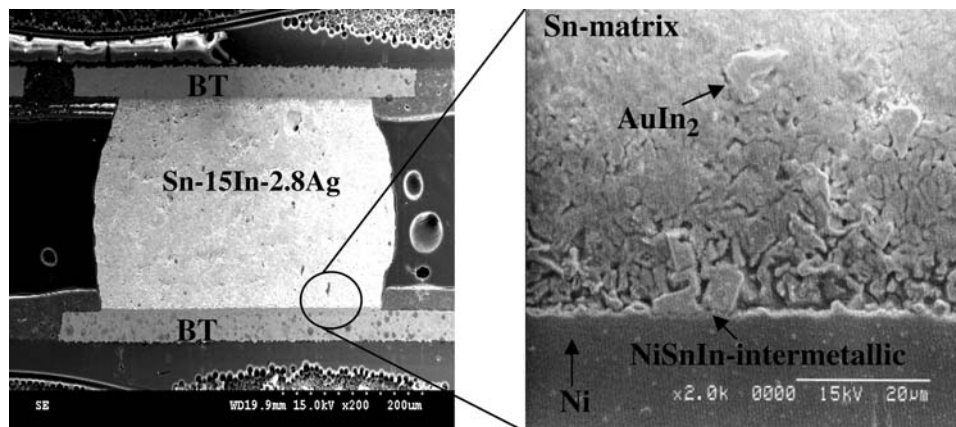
Cross section of the Sn-15In-2.8Ag BGA assembly
